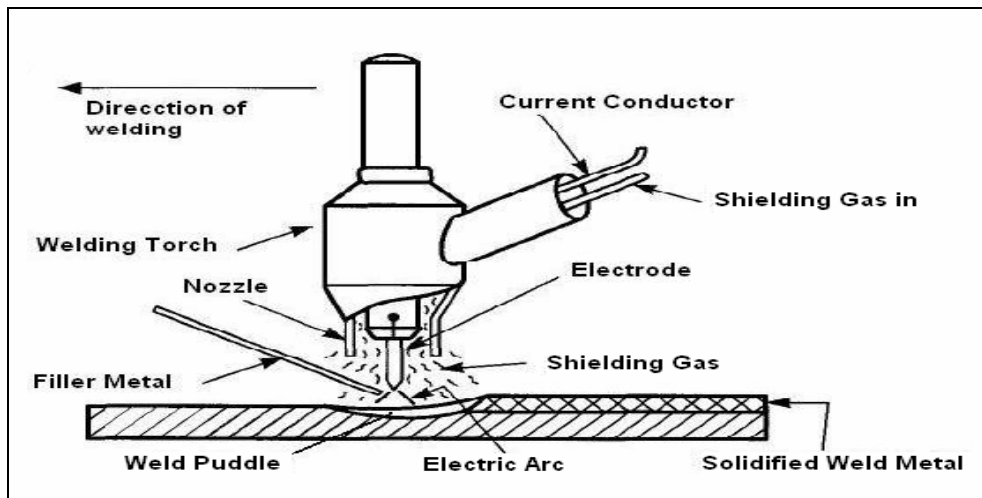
Schematic View of the Gas Tungsten Arc Welding Operation. [1]
